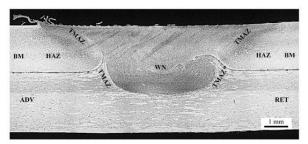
Benchmark: Conventinal butt welding tool used for lap joints at 1200 rpm at 250 mm/min^[3]
